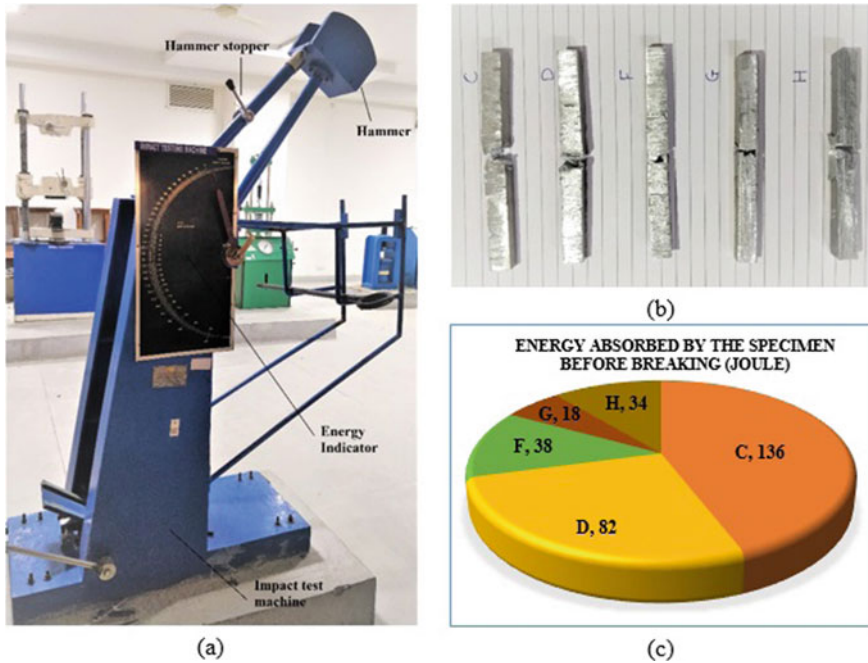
Charpy impact test of welded specimen; a Impact test machine; b tested specimen; c comparative analysis of energy absorbed by different samples
